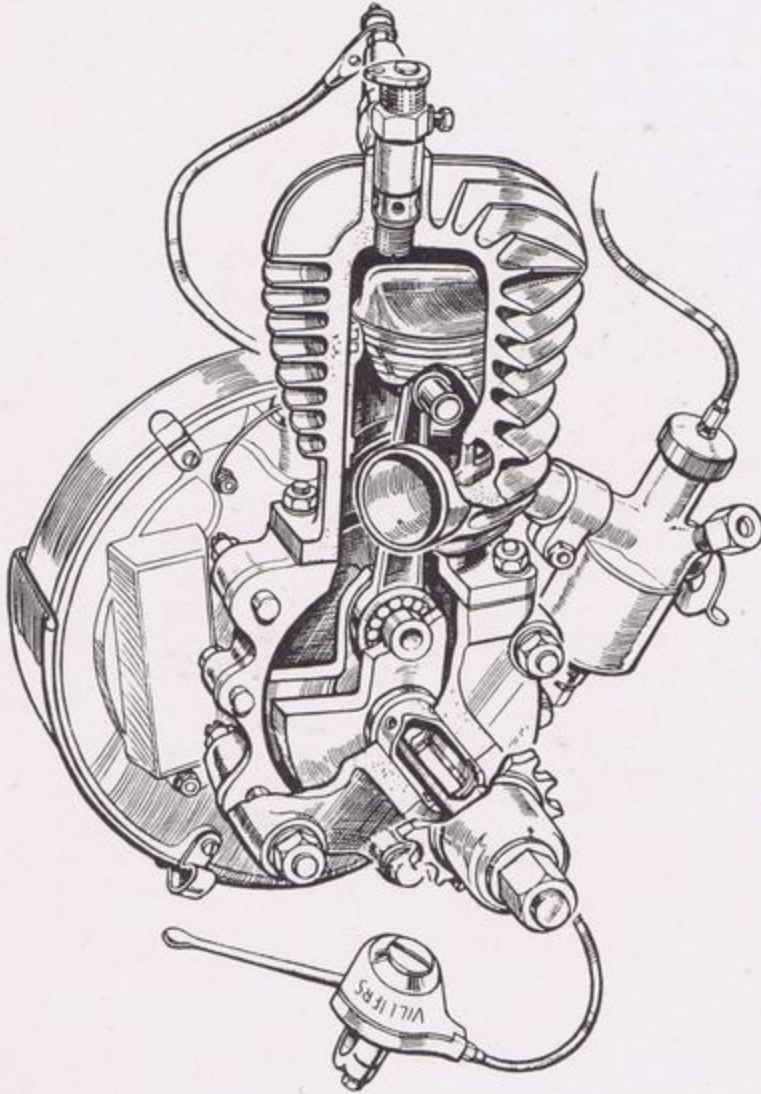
The Villiers 98 c.c. Engine (*The Motor Cycle*).
